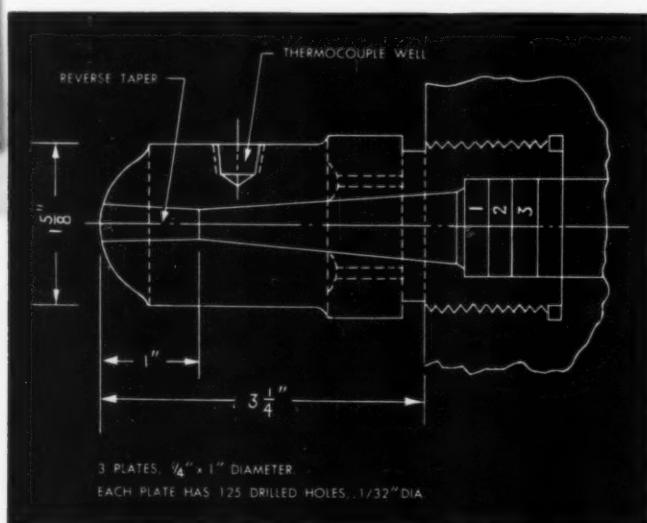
An injection machine nozzle with a reverse taper bore is recommended for use with nylon. Nozzles of this general design can be adapted to fit all types of machines.
